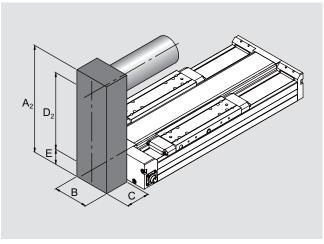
Screw drive with coupling and intermediate plate (mounting condition 02)
